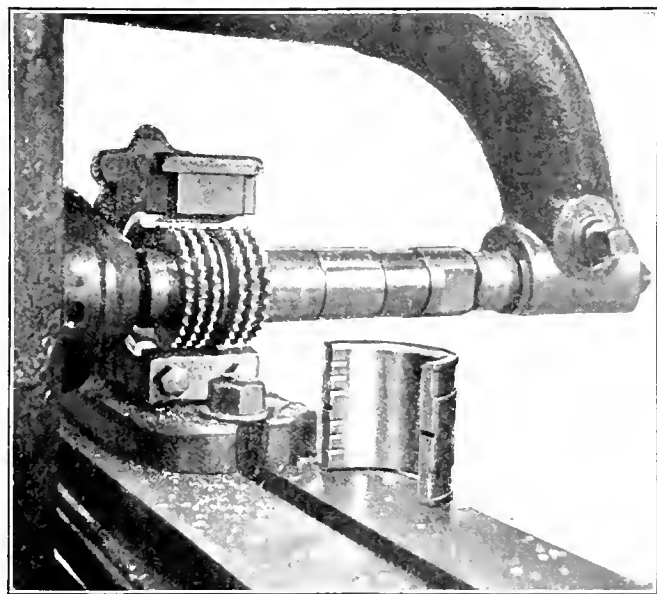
METHOD OF CUTTING OIL GROOVES—OPERATION 20
